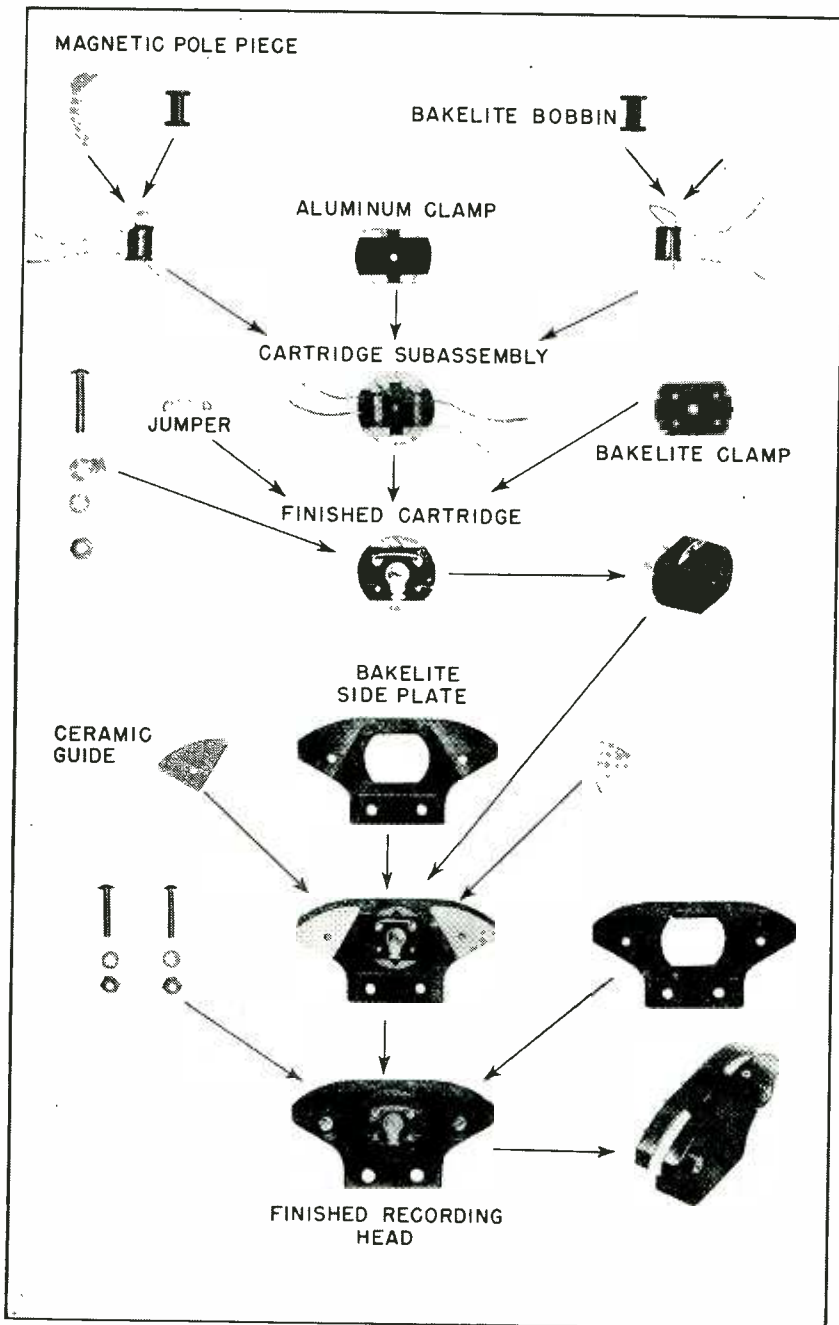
Assembly details of a ring head designed for recording on wire or narrow tape. It consists of an essentially closed magnetic circuit that engages the recording medium on one side only
